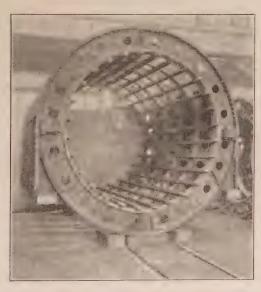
Stator Complete, Ready for Stacking of Armature Core of 62,500-Kv-a., 1200-Rev. per Min. Generator Showing multiplicity of ring castings tied together by boiler plate riveted to the outer periphery and by steel bars bolted to inner periphery that carry dovetail slots for assembly of laminations and threads at ends
